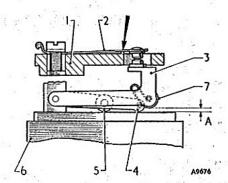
The contact gap setting on earlier-type rocker assemblies
